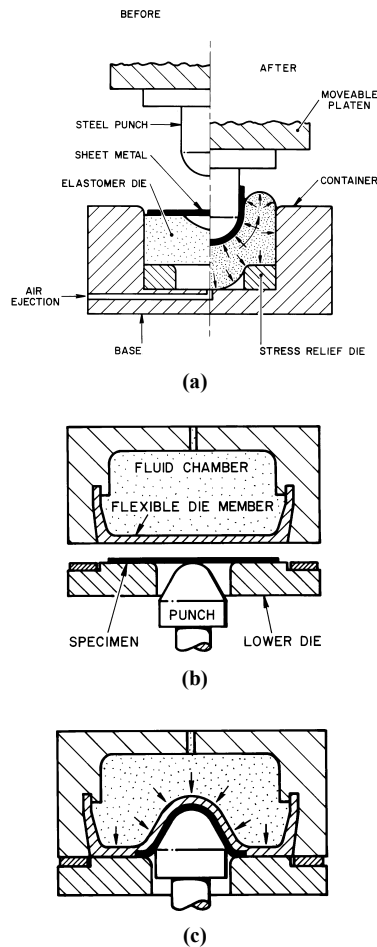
Deep drawing with an elastomer die. (a) Deep drawing with an elastomer pad; (b) & (c) deep drawing with pressurized fluid; (b) before, (c) after.
